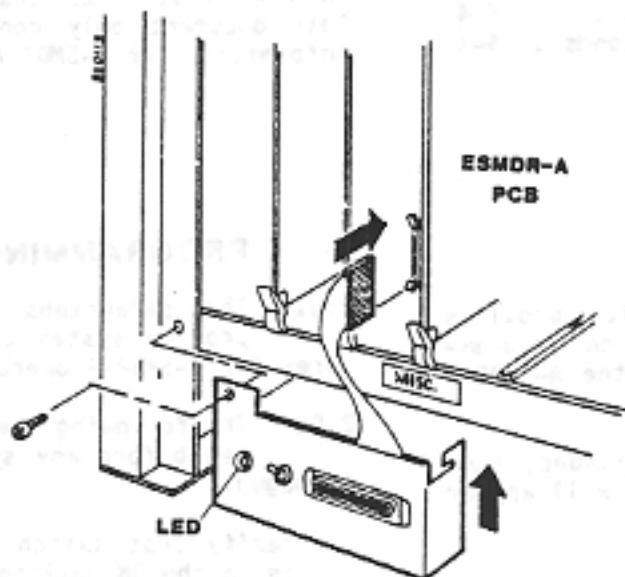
Mounting Cable and Jack Assembly to the KSU.
